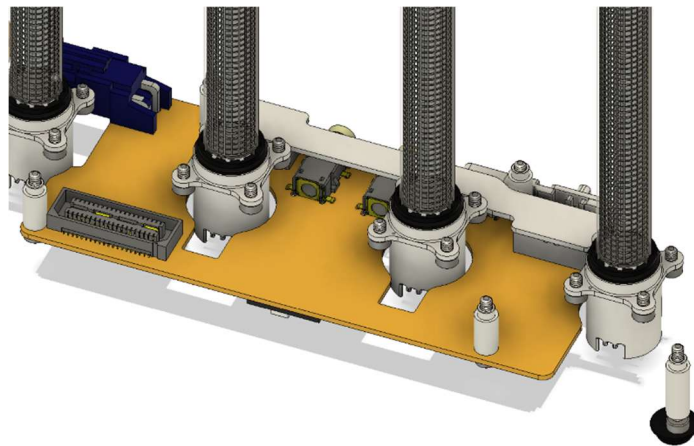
Low Voltage Board's Cutouts for Tube Assembly Clearances
